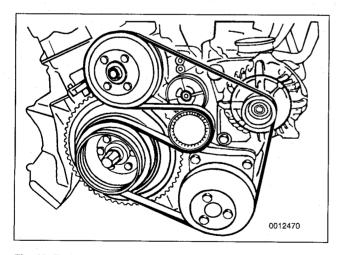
Engine drive belt routing for 6-cylinder engine. A/C compressor drive belt not shown.
